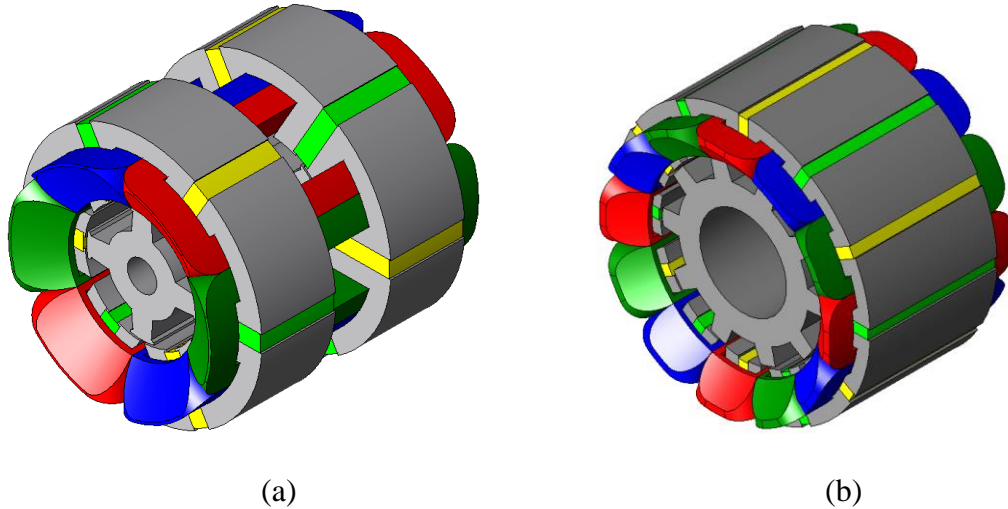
Optimized two machines in 3D view, (a) dual-stator 6/4 FSPM machine, (b) 12/10 FSPM machine.
